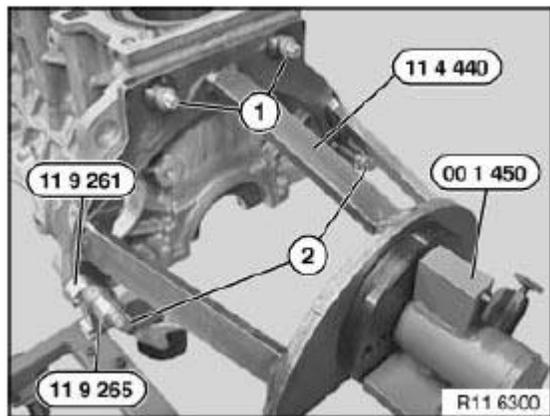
Connecting Engine With Special Tool 11 4 440 Using Bolts
